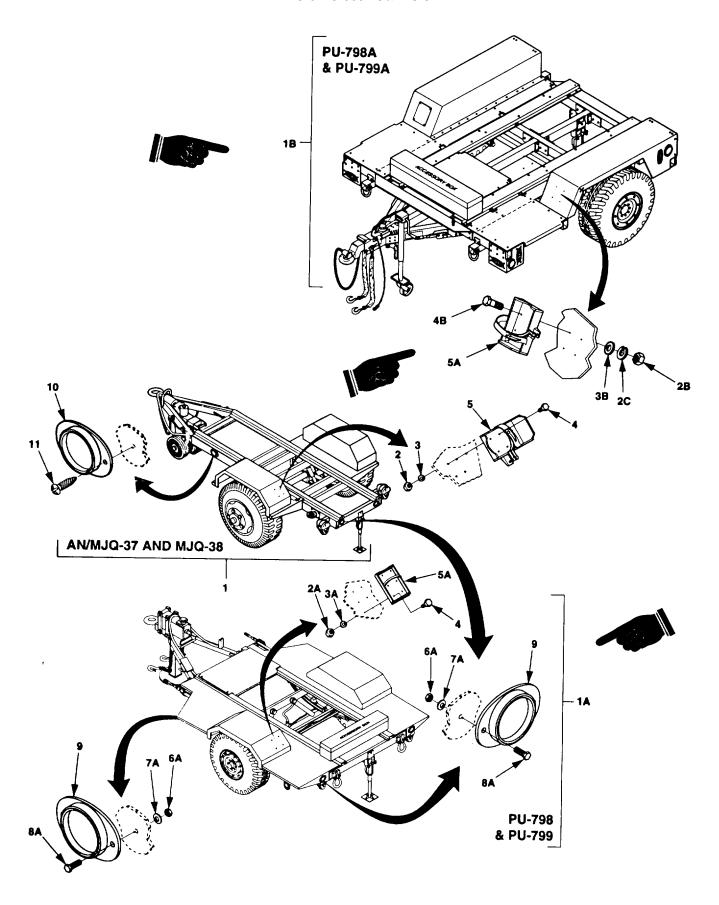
Power Plant/Power Unit Trailer Assembly (Sheet 2 of 2)
